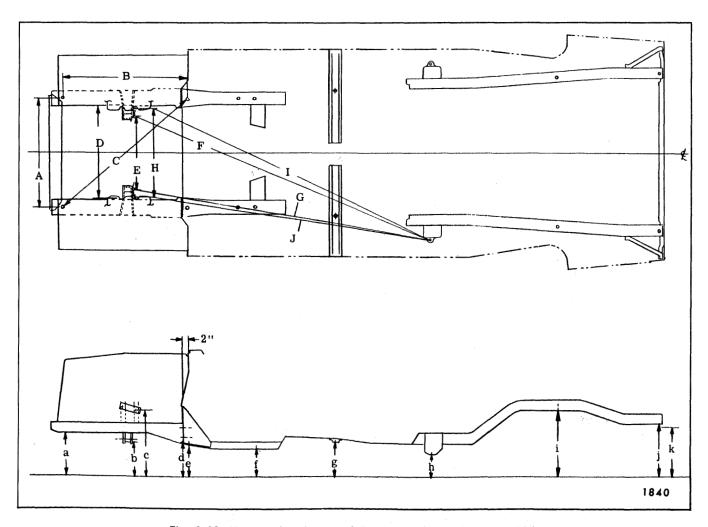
Horizontal and Vertical Dimensions (Front Skirt Assembly)
